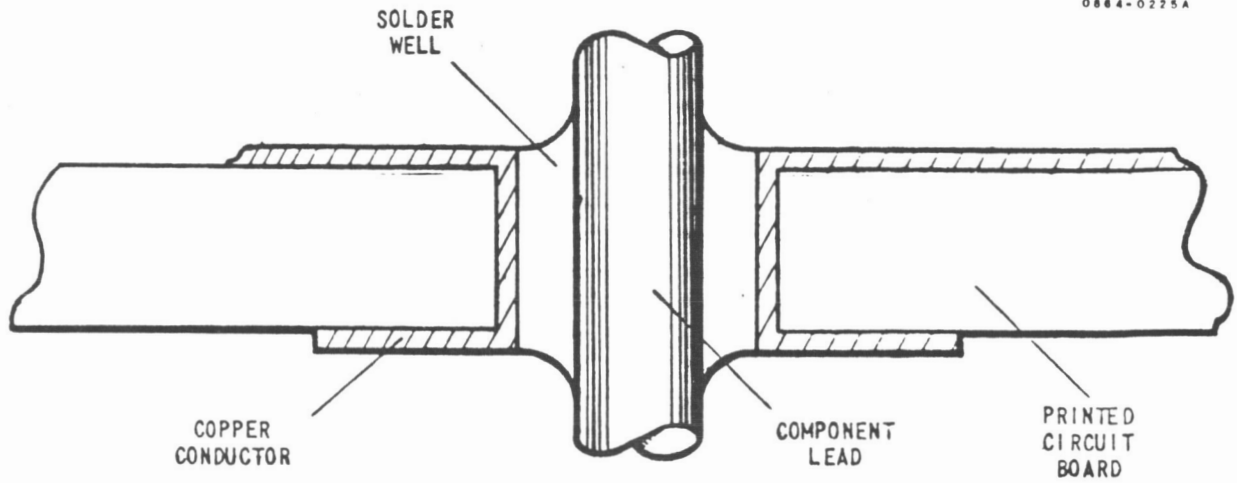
PRINTED CIRCUIT BOARD SOLDERED CONNECTION
